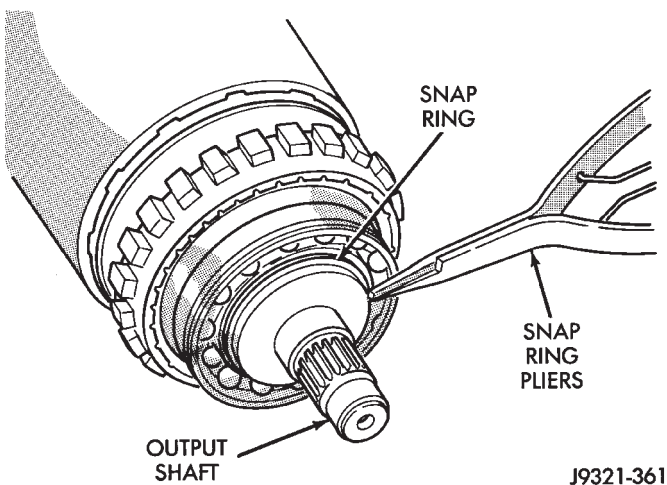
Rear Bearing Snap Ring Removal/Installation
